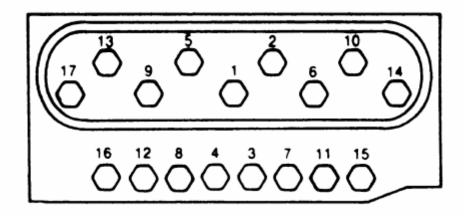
Cylinder head bolt torque sequence - V8 engines
